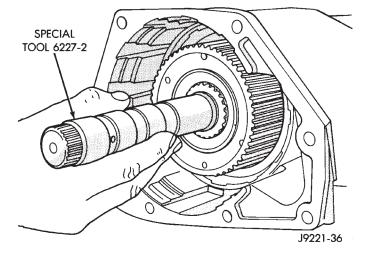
Checking Alignment Of Overdrive Planetary Gear And Overrunning Clutch Splines
